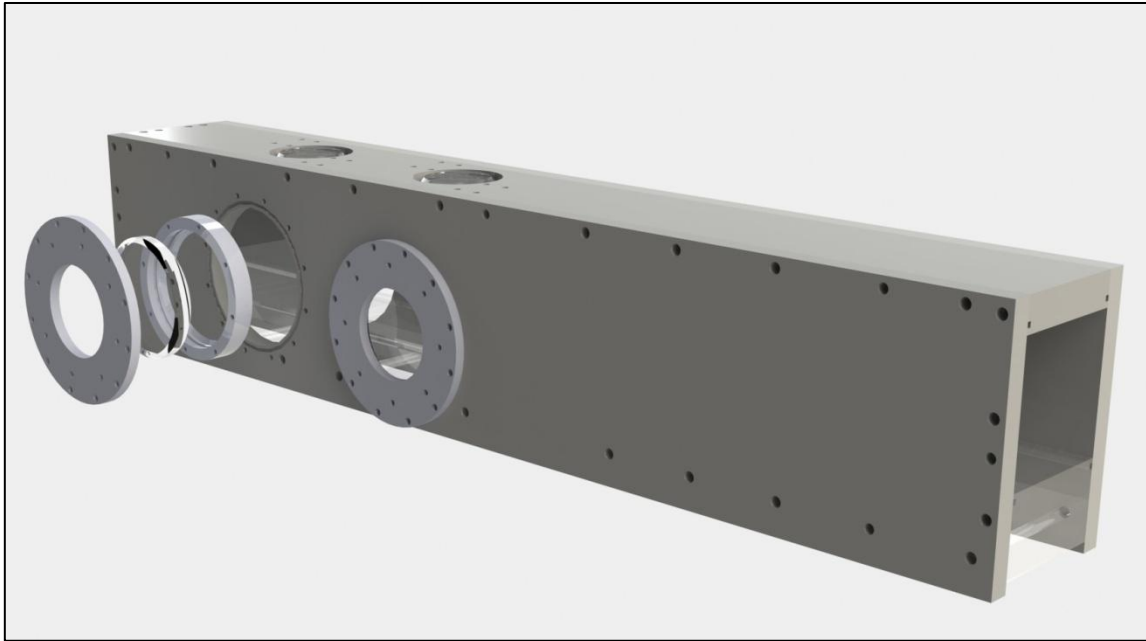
Test section assembly, with an exploded view of the side window frame. *Flow is from left to right.
